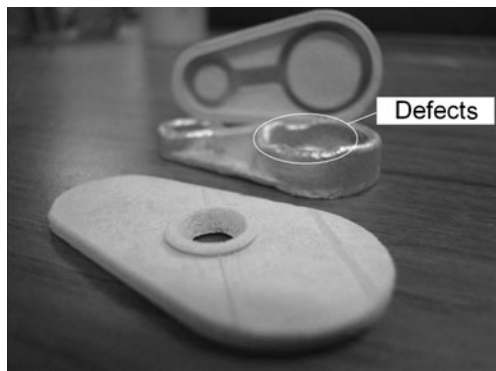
Defects on a metal part made by a ceramic shell mold fabricated with the process of CLF
